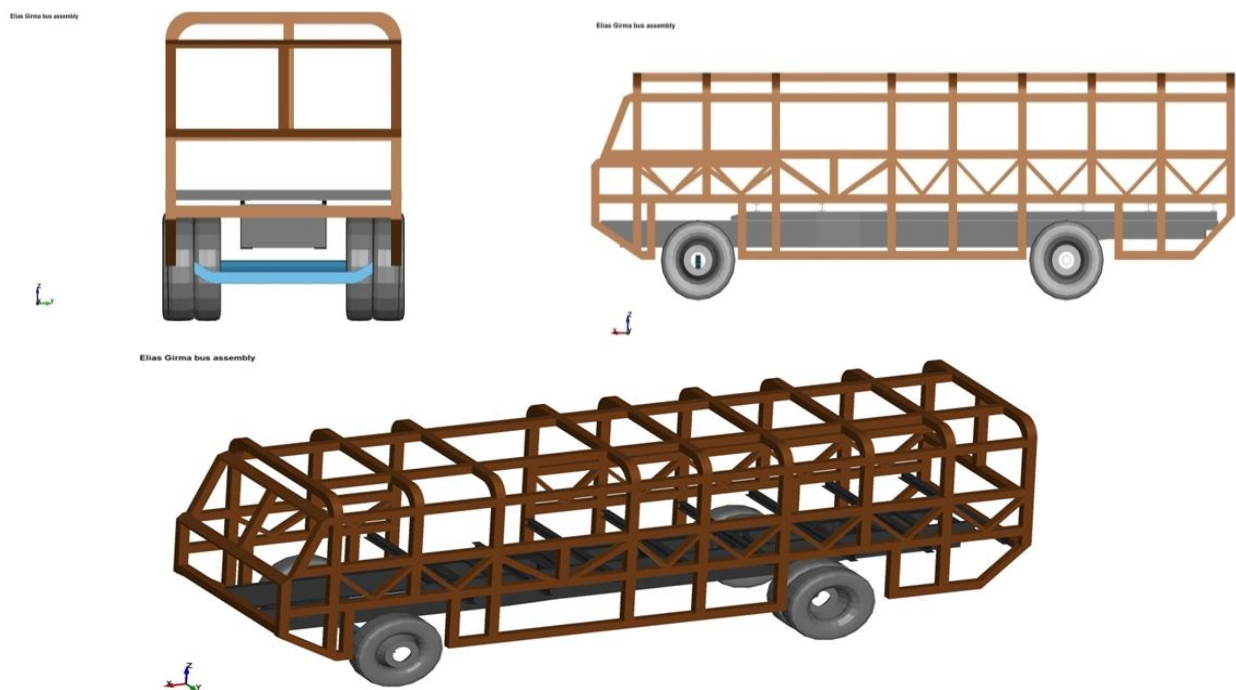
Side, Front and Isometric view of Isuzu bus model assembly
